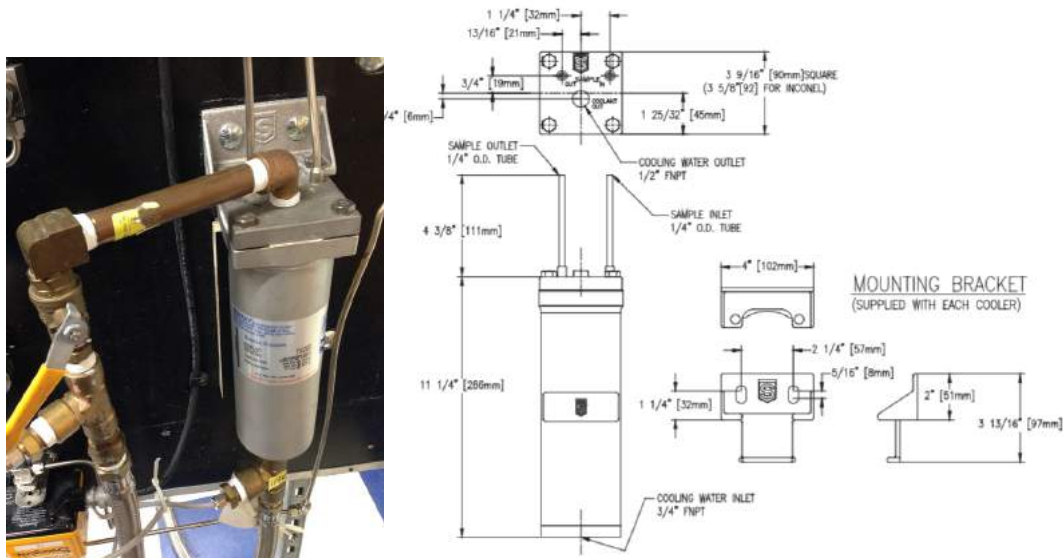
Photo of sample cooler (left) and dimensional diagram of sample cooler (right) [214].
